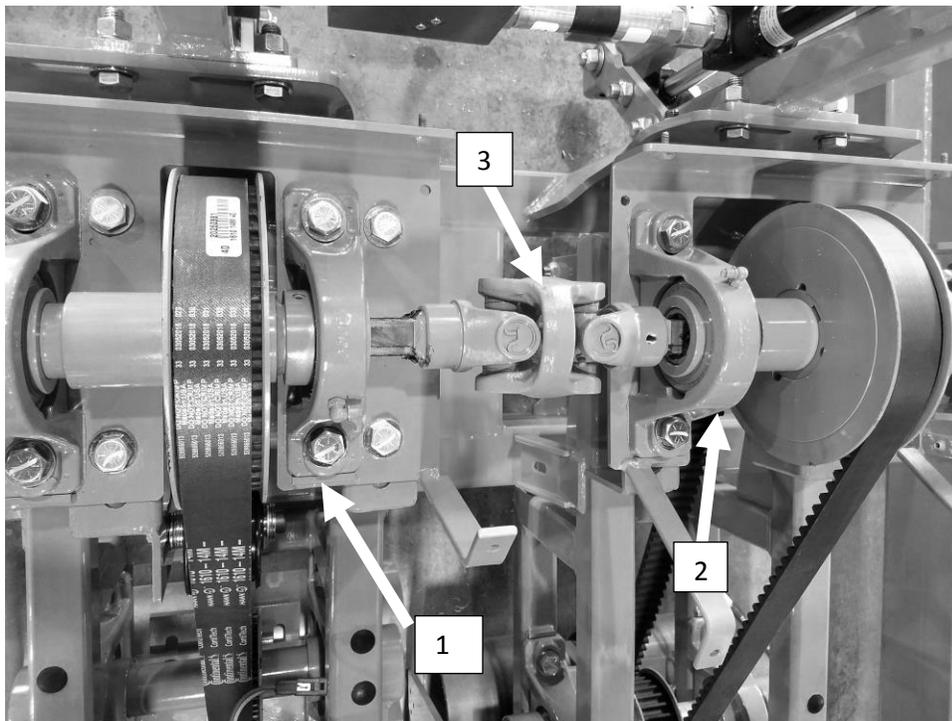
View showing the left cutter head (1), right cutter head (2) and Driveshaft (3).
